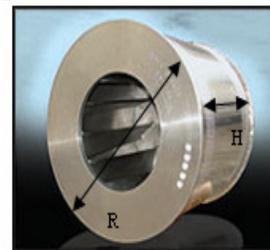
Side view of prilling bucket designed in this study. (R=30 cm, H= 50 cm)
